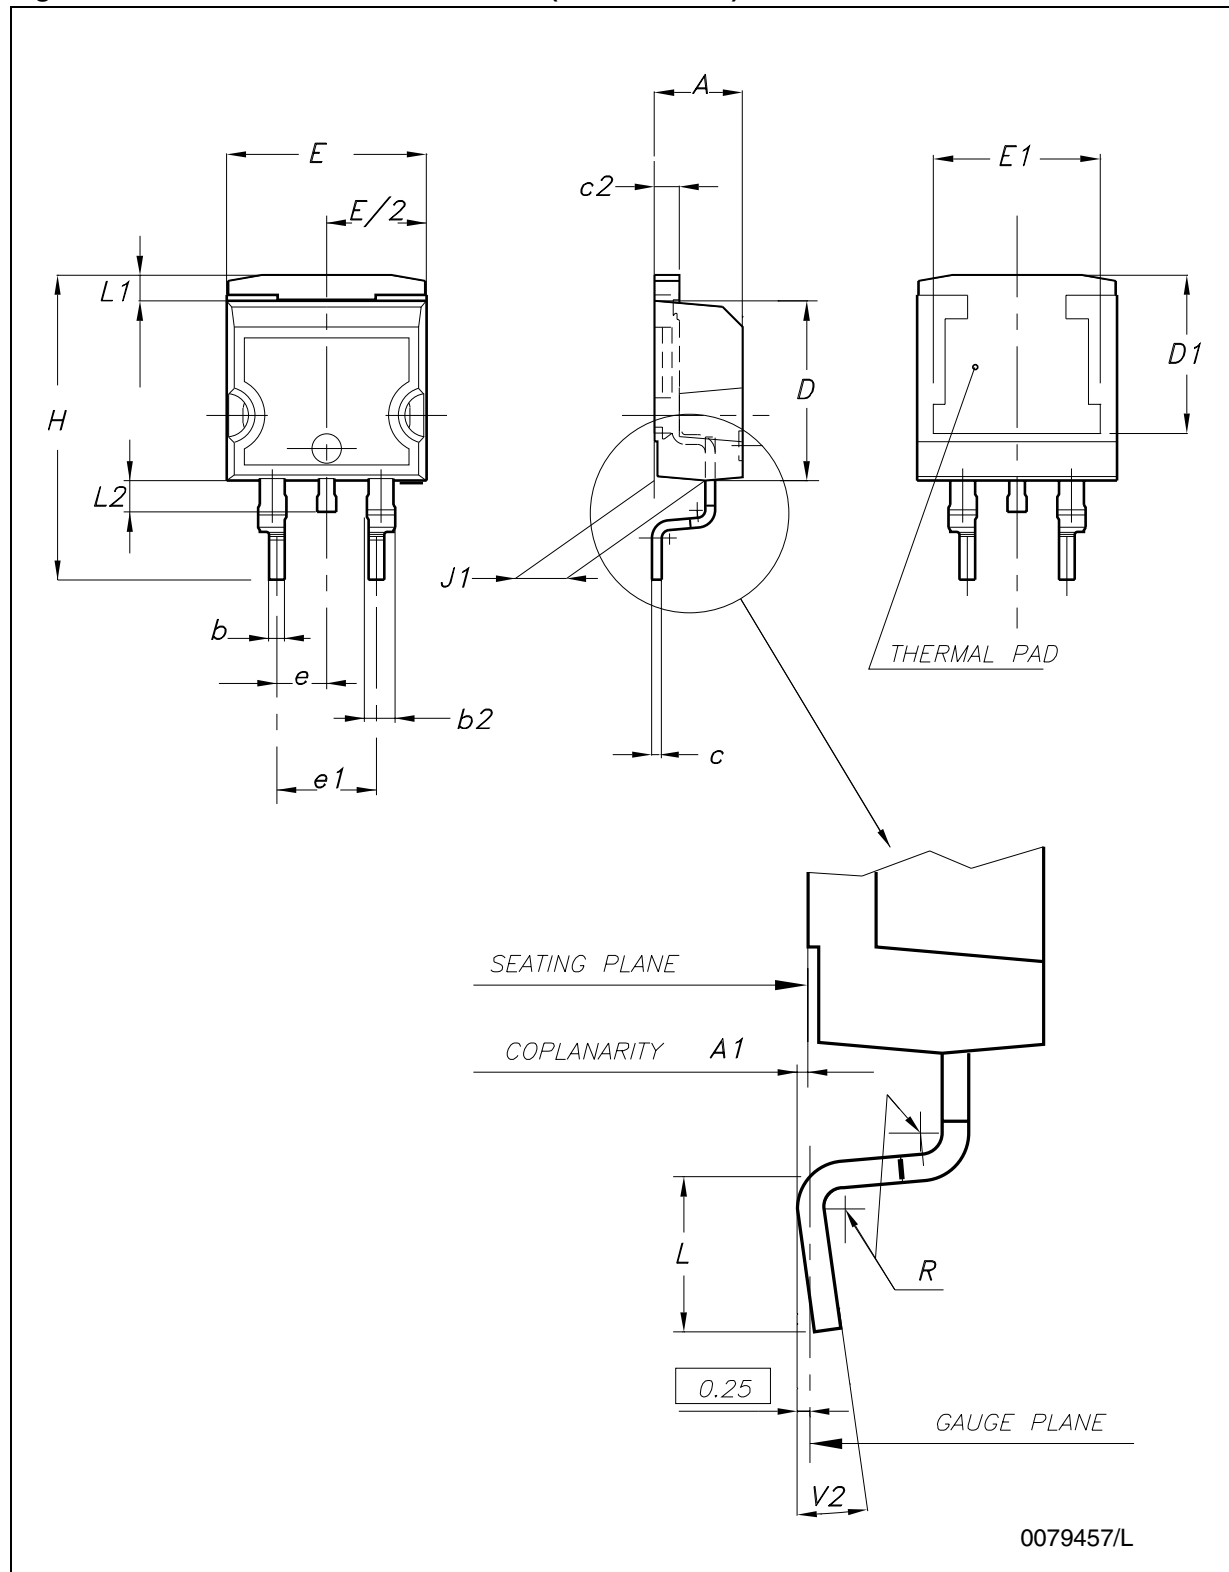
DRAWING DIMENSION D²PAK (TYPE STD-ST)
